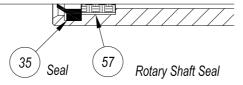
Retaining Nut Wiper Seal [35] Fitting
